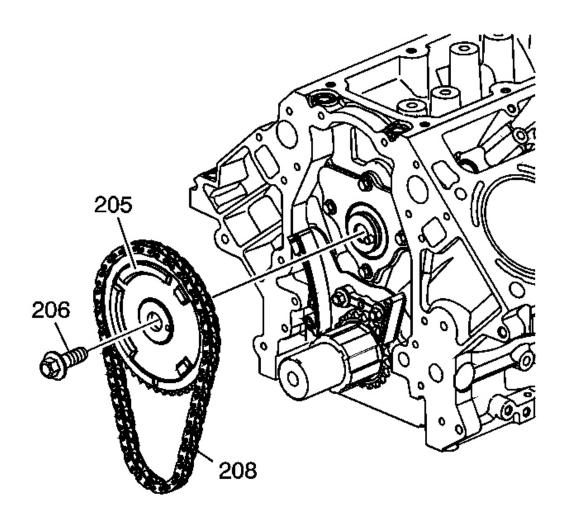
View Of Camshaft Sprocket, Timing Chain & Sprocket Bolt Courtesy of GENERAL MOTORS CORP.
